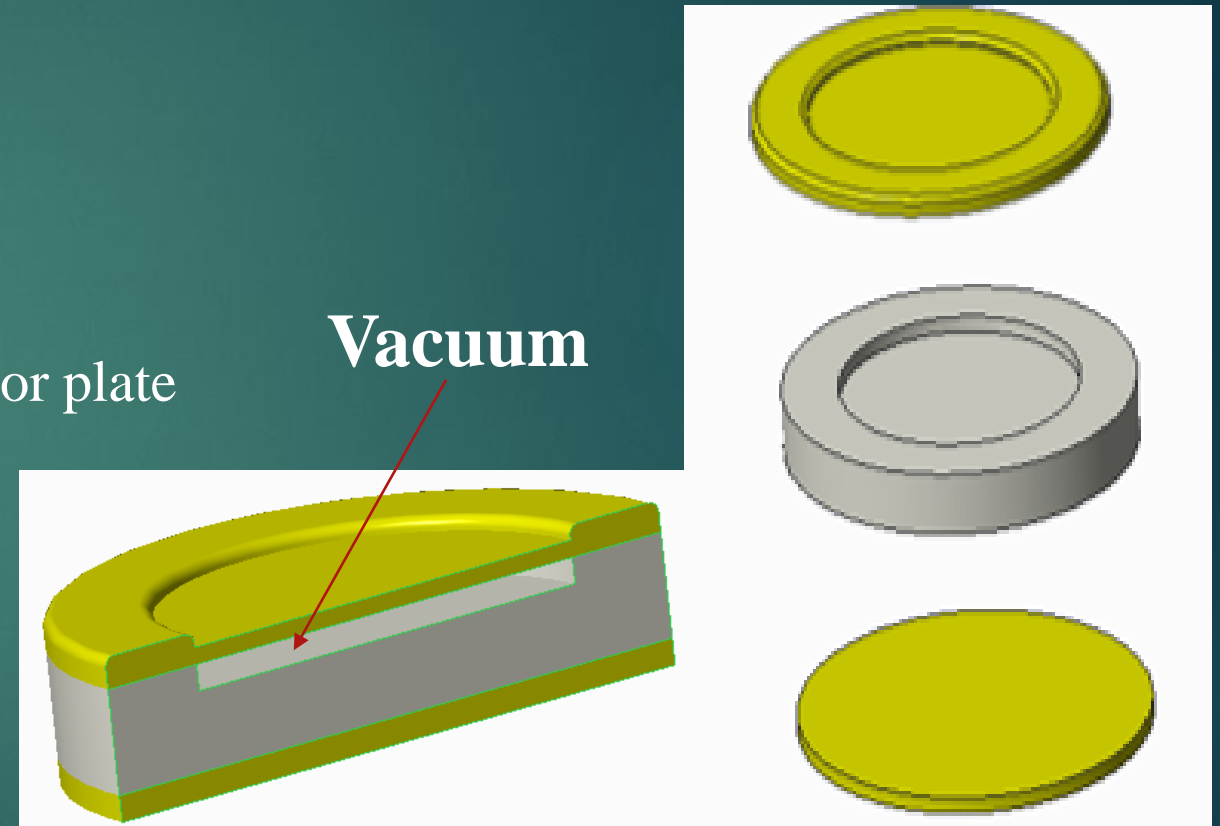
Cross section view of capacitor (left), and exploded view (right)
